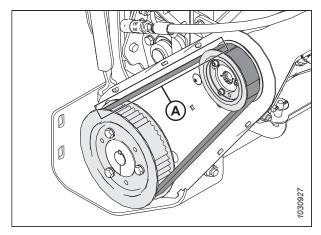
Drive Belt and Pulleys – Conditioner Drive Motor
